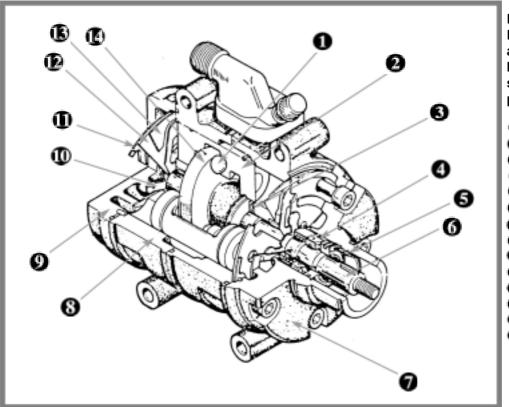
Double-ended piston axial compressors have pistons that straddle the swash plate.
